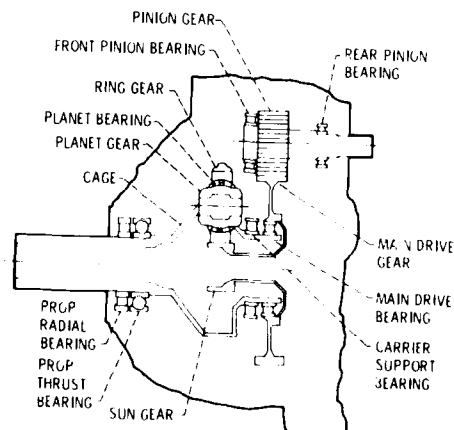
Typical turboprop reduction gearbox (ref. 12).
